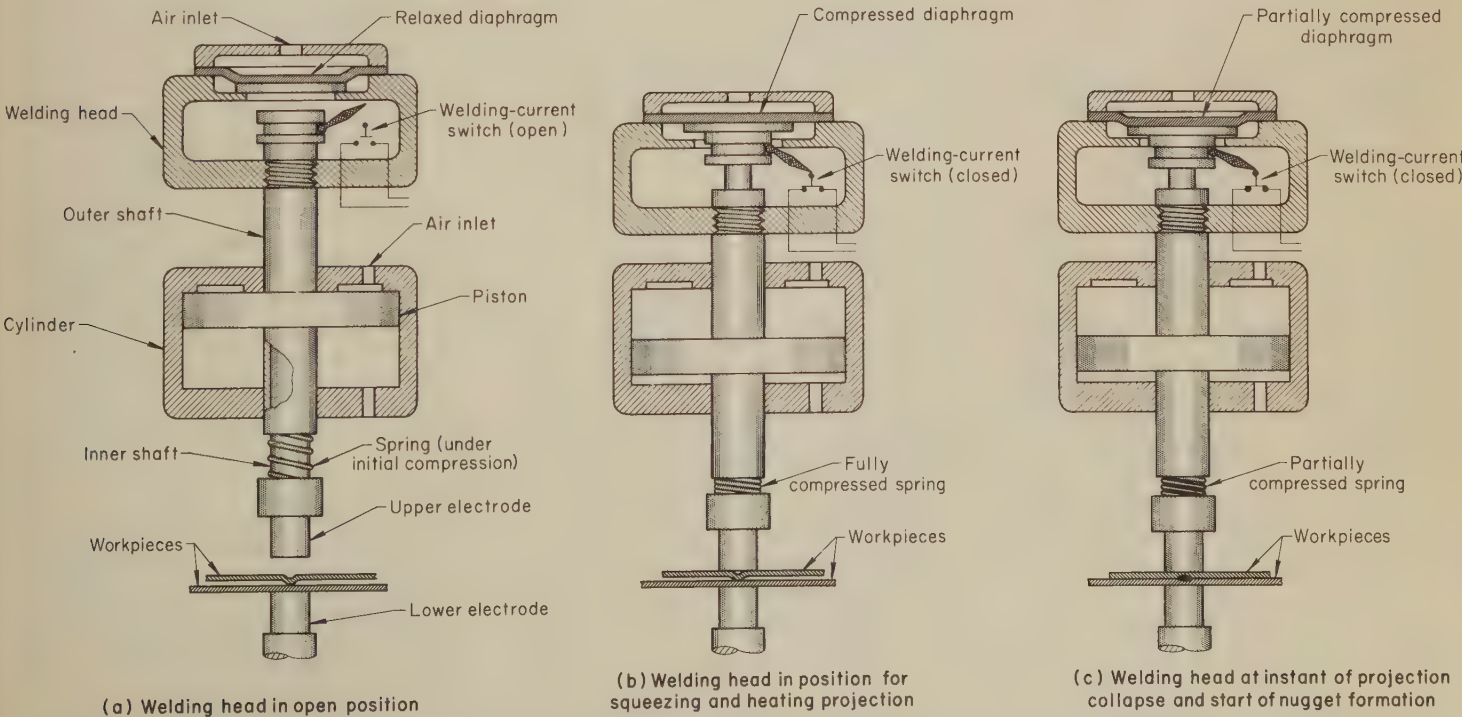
Low-inertia welding head for a projection welding machine
